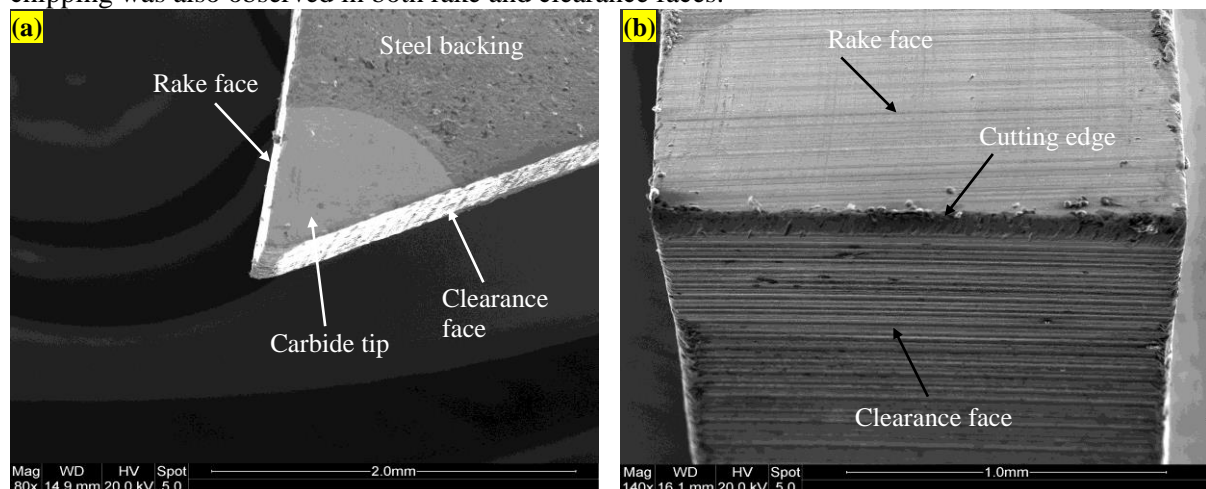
(a) Features of a carbide tipped bandsaw tooth and (b) Close view of the tooth cutting edge.
